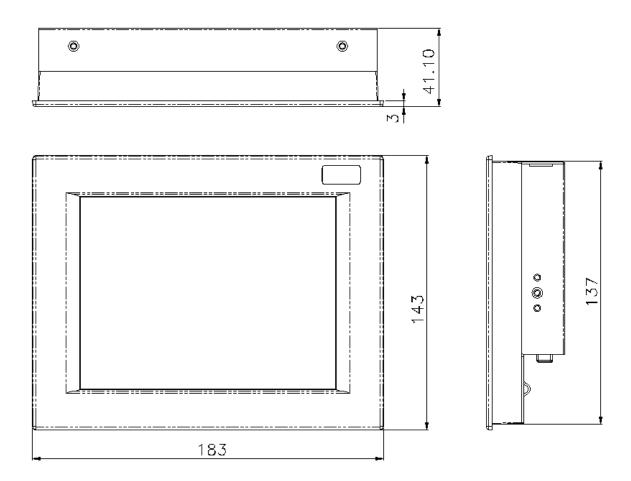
MPE 06 Physical Dimensions (millimeters)
